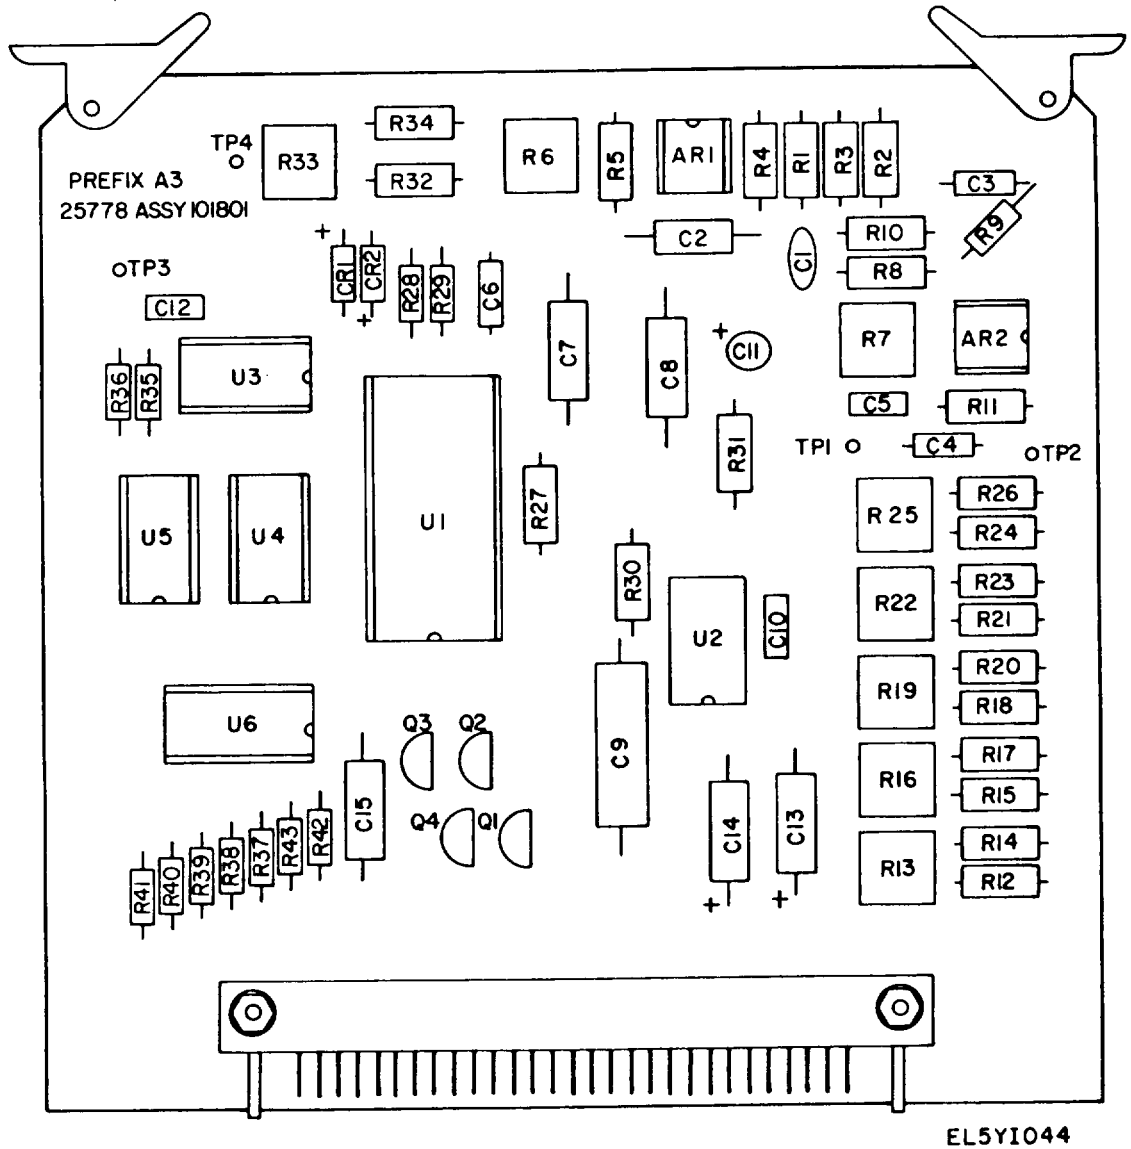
POWER SUPPLY REGULATOR ASSEMBLY A2A2
